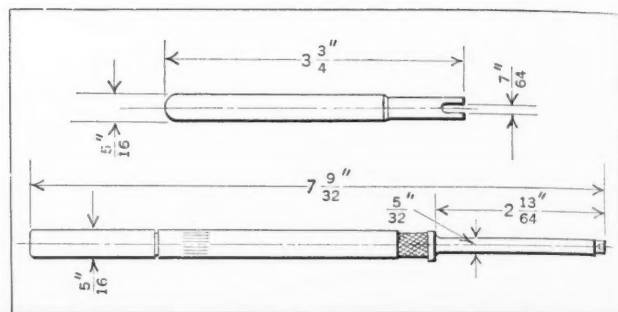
Parts of the Type for which the Equipment Shown in Fig. 6 is Suitable
